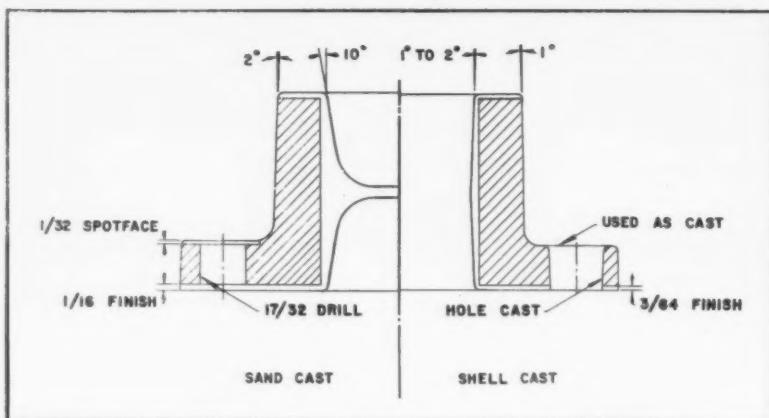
Shell mold eliminates web in hub. The 17/32-in. holes are used as cast, eliminating spot-facing and drilling.
